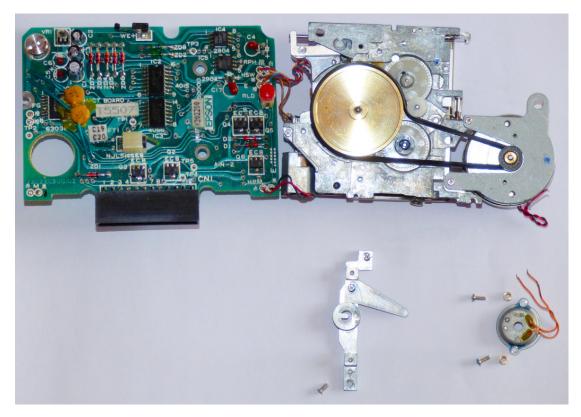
The PCB can be unfolded after unsoldering motor and tachometer cap wires and after removing the bar across the large drive wheel and the tachometer cap. The new belt has already been installed. In the upper left, you can also see the three electrolytic capacitors C1 to C3 on this board, which may also be replaced.
